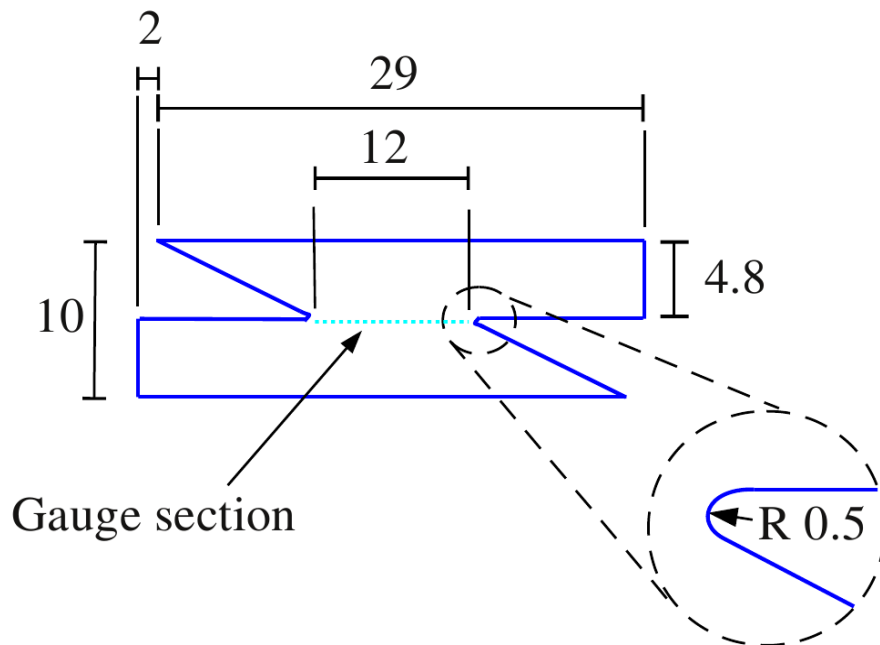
Schematic showing dimensions of Z-Shear specimen
